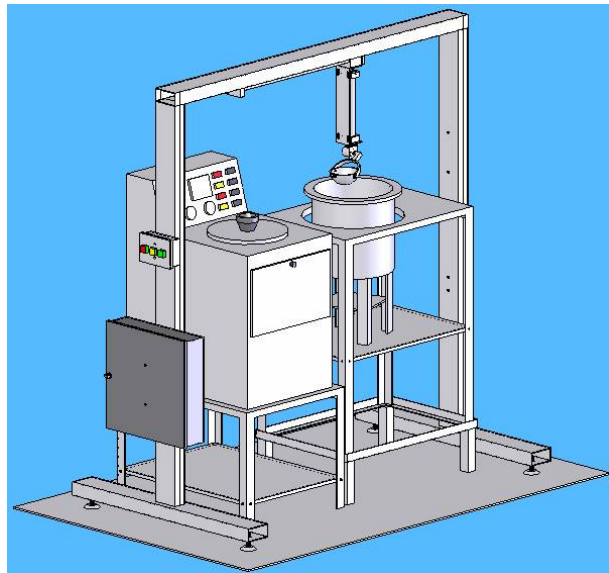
Automatic Spin Casting Machine, (1) Spin Casting Machine, (2) Melting Furnace, (3) Automatic Pouring Machine.
